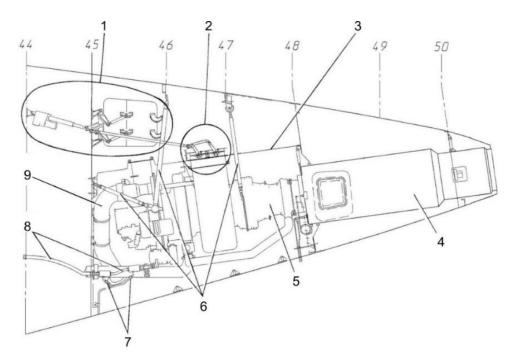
Auxiliary Power Plant Installation Scheme:
